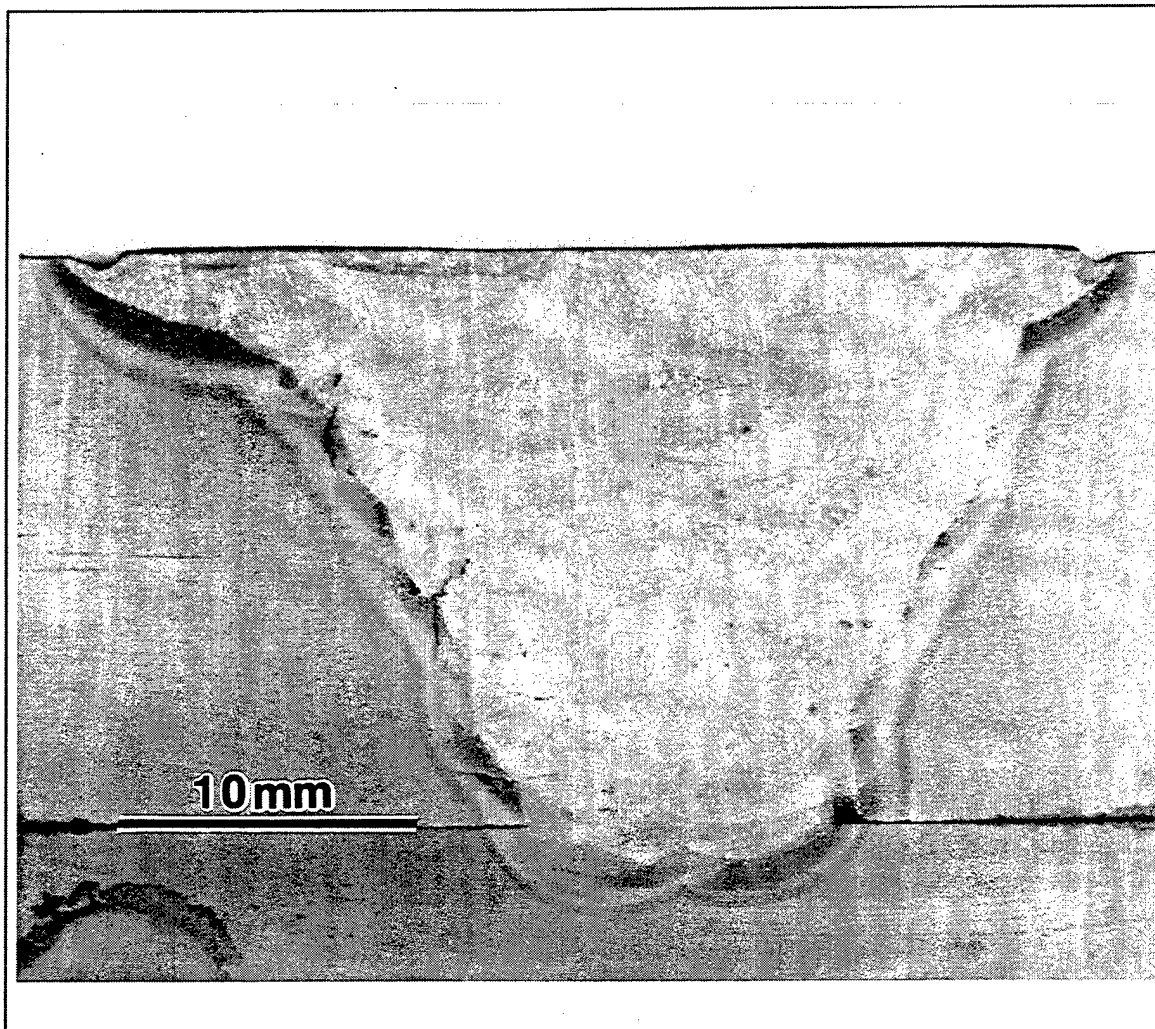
Macro photograph of UWW10 weld sample. Welded at a depth of 5.5m in seawater and at a temperature of 10°C.
